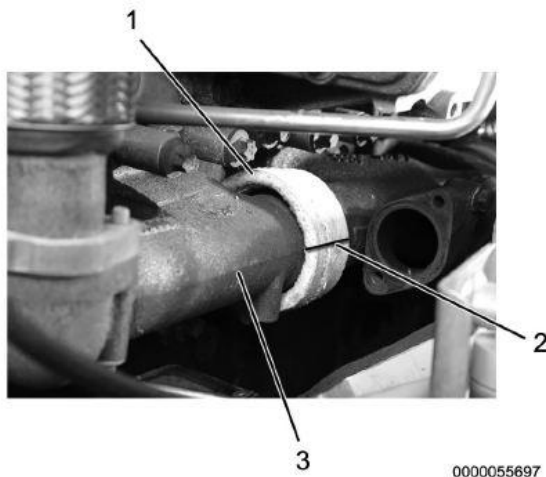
Rear Exhaust Manifold Ring Seal Ceramic Mat Wrap
